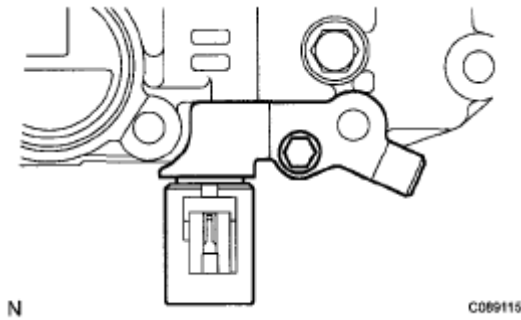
Identifying Shift Solenoid Valve SL1 Bolt
